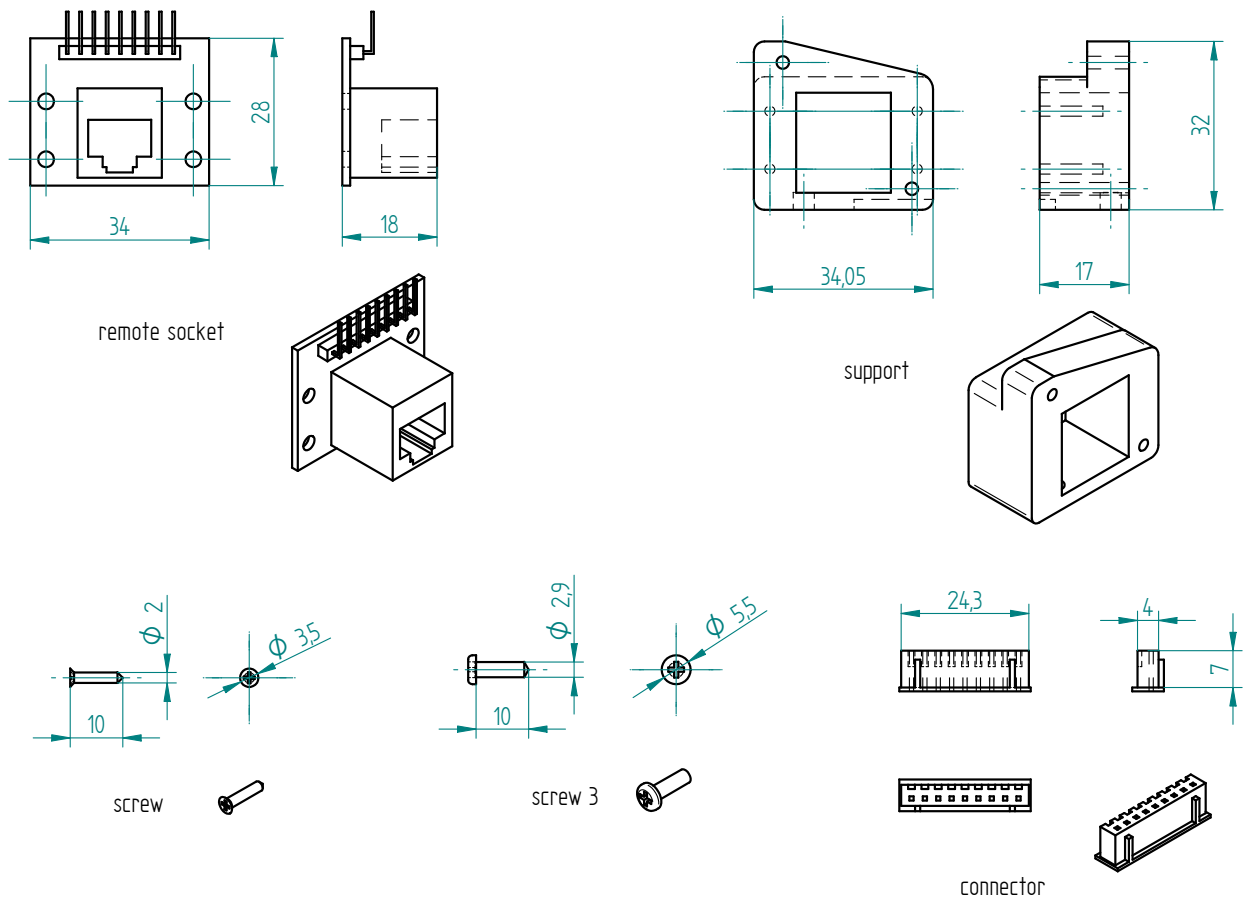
power unit p/housing/remote socket parts drawing
